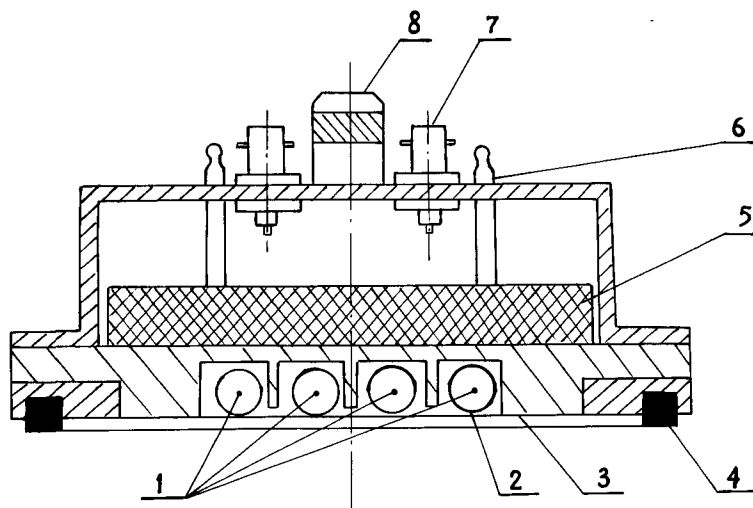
Surface contamination detector. 1-anodes; 2-insulators; 3-net; 4-rubber ring; 5-lead disk; 6-gas connection pipe; 7-plug connector; 8-grip.
